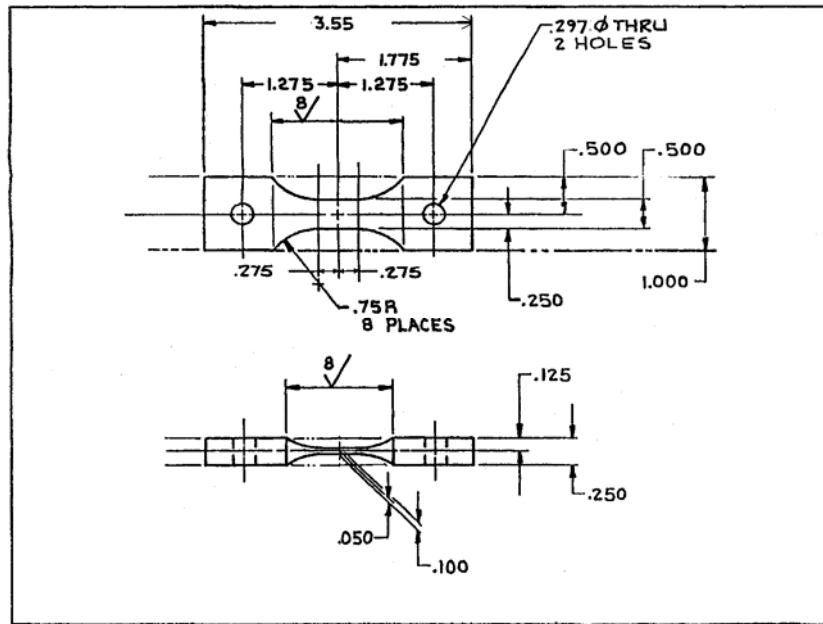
GEAE pin-loaded single edge notched fatigue crack growth specimen.
